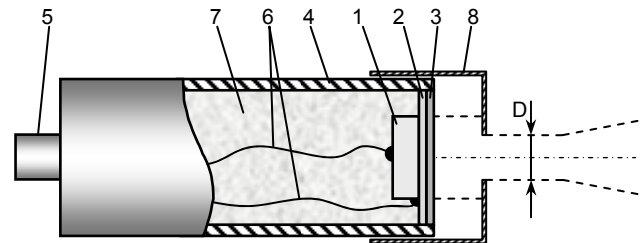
Construction of the air – coupled ultrasonic transducer with a collimator: 1 – piezoelement; 2, 3 – matching layers; 4 – housing, 5 – connector; 6 – connecting wires; 7 – damping; 8 – collimator.
